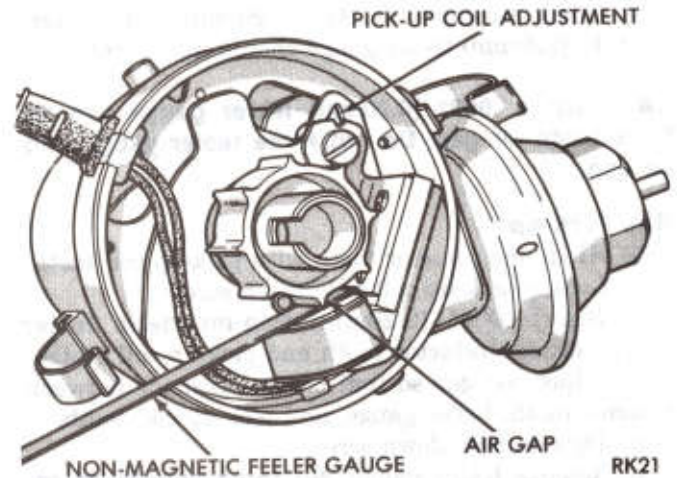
Air Gap Adjustment Single Pick-Up (8 Cylinder Shown)
